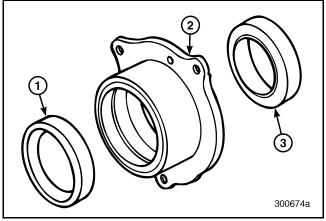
Exploded View of Front Countershaft Rear Bearing Cover
